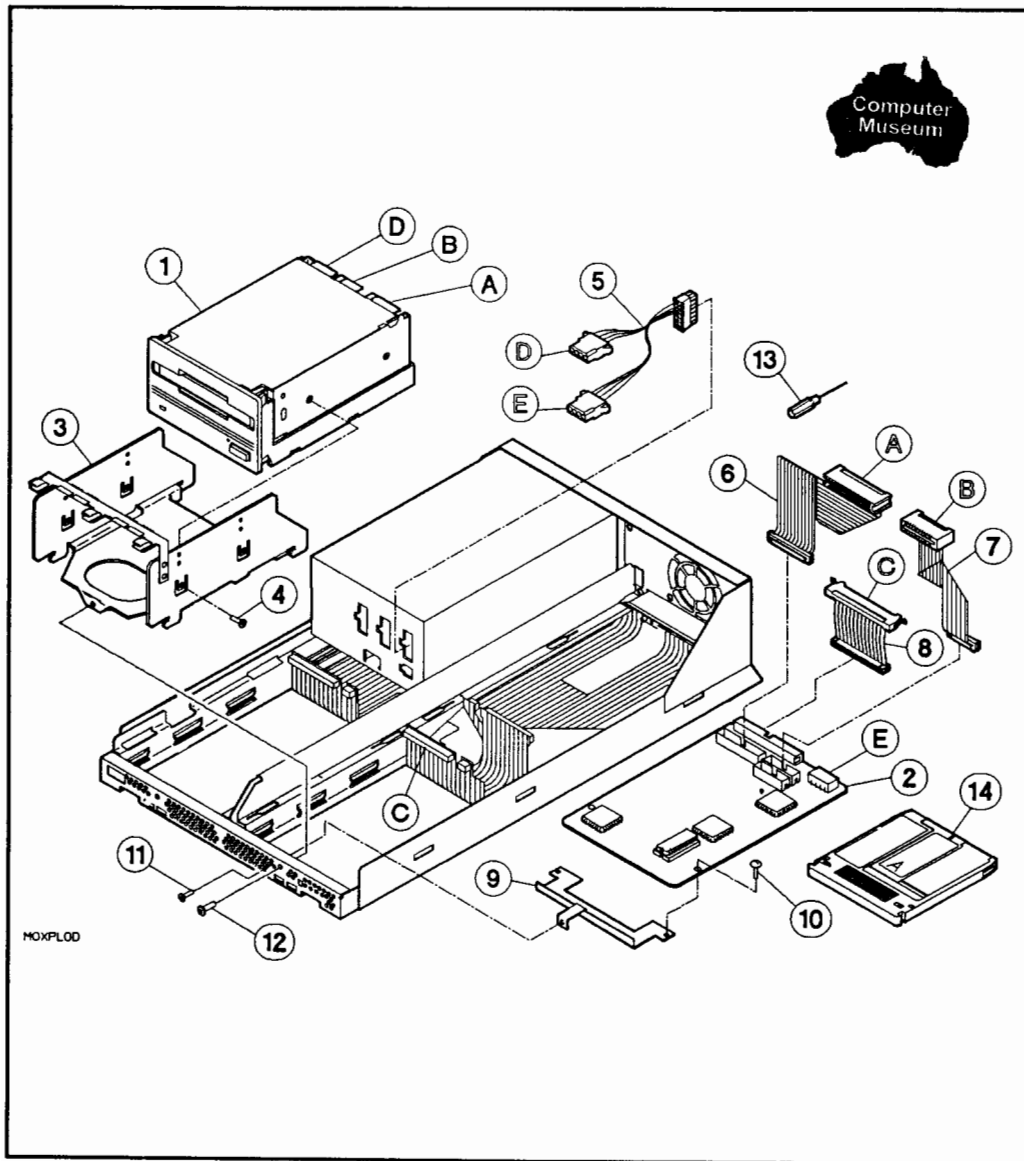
Rewritable Optical Disk Drive, Exploded View
